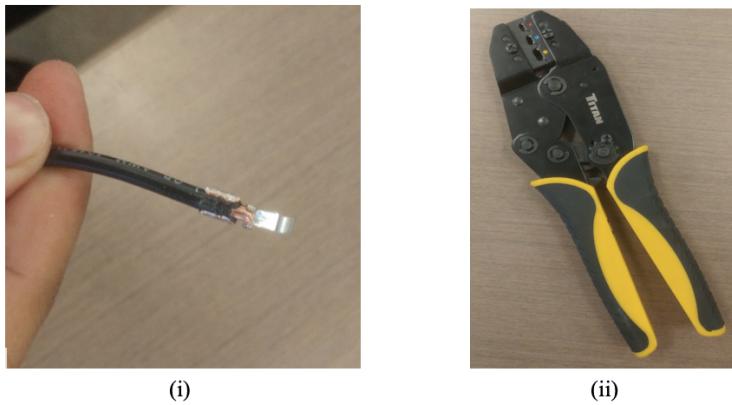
(i) PP15 reels on a 12-gauge wire, (ii) Molex clamping tool
